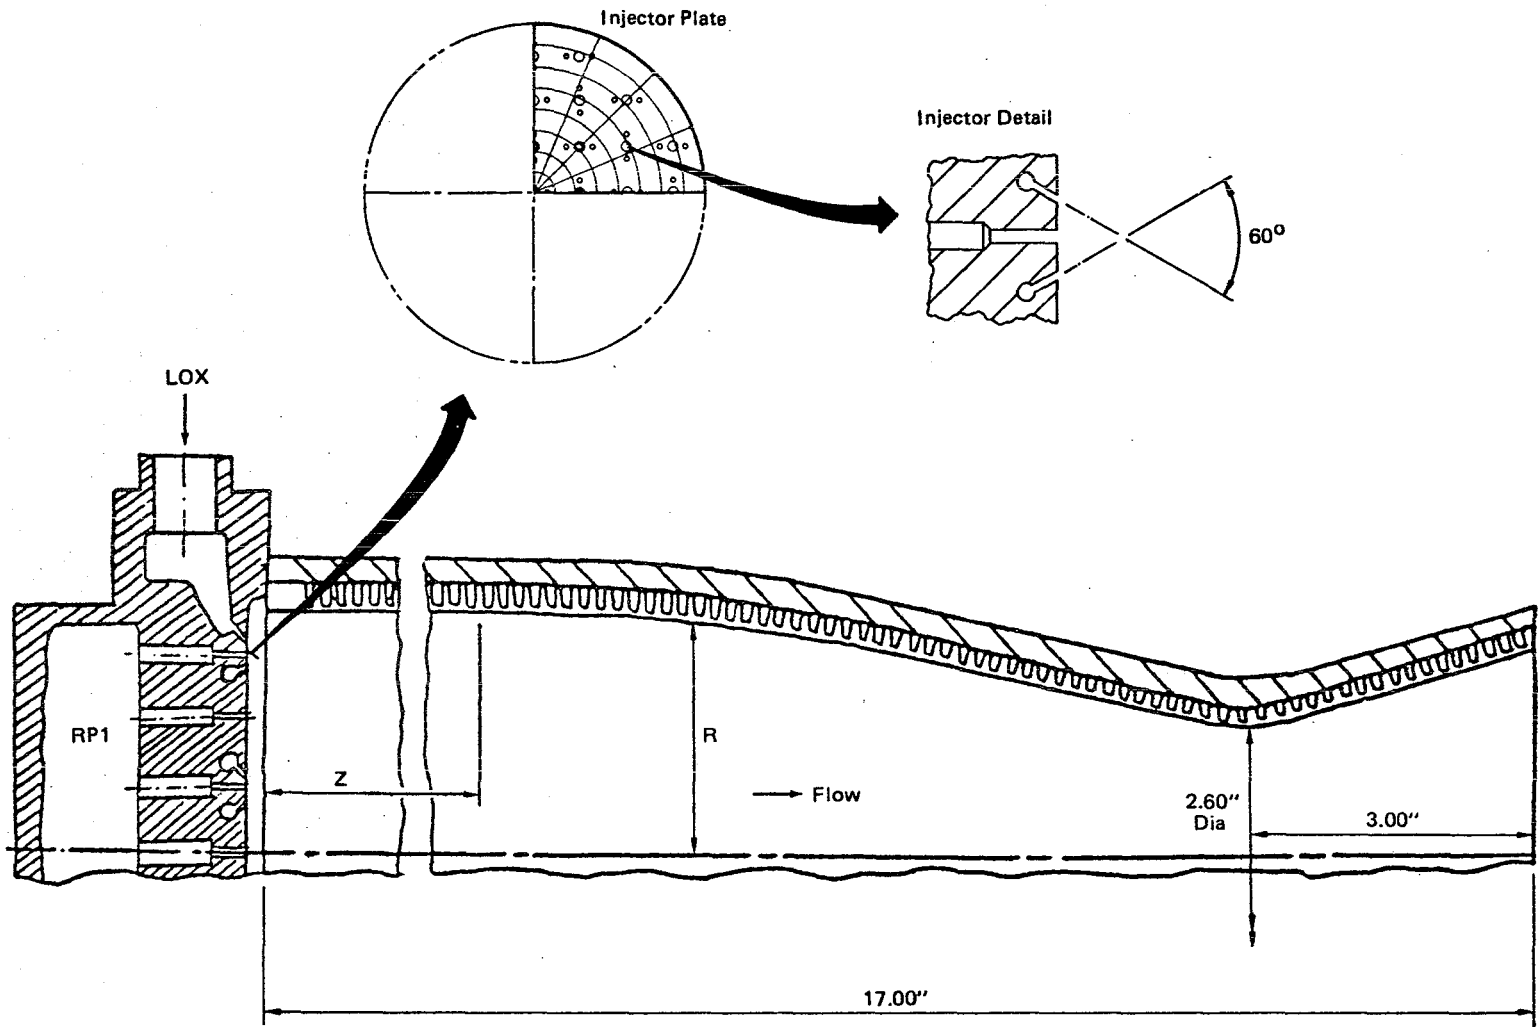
Rocket Engine Geometry and Injector Plate Configuration
